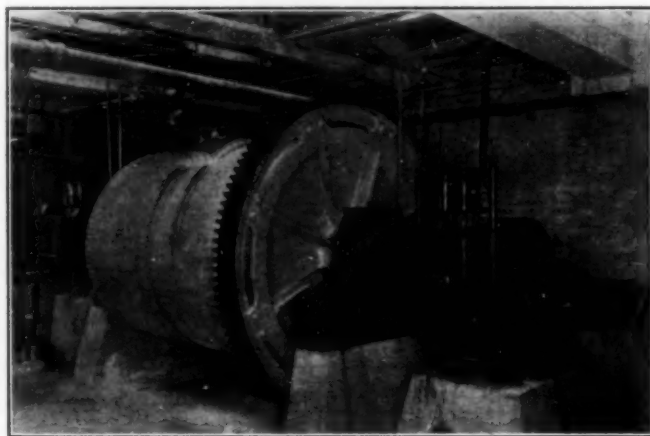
PEBBLE MILL FOR GRINDING BATCHES
